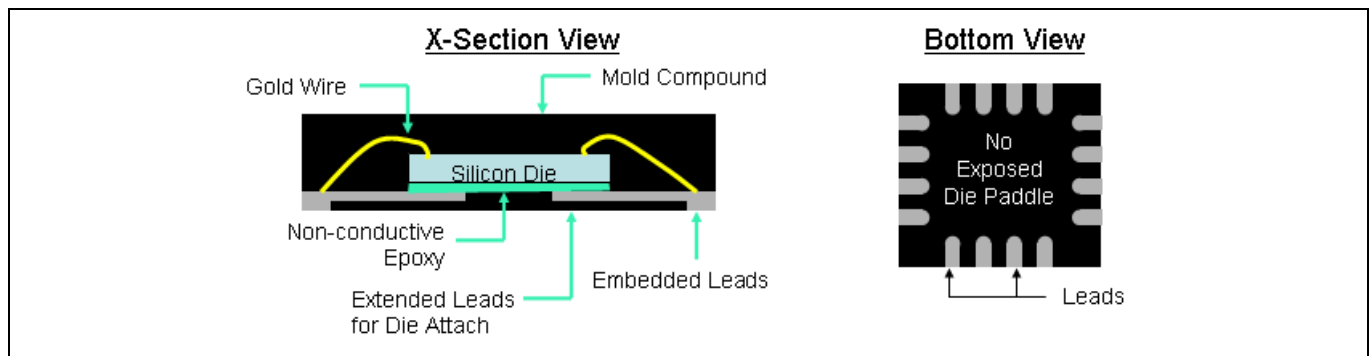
Chip on leads (COL) QFN without exposed die paddle
